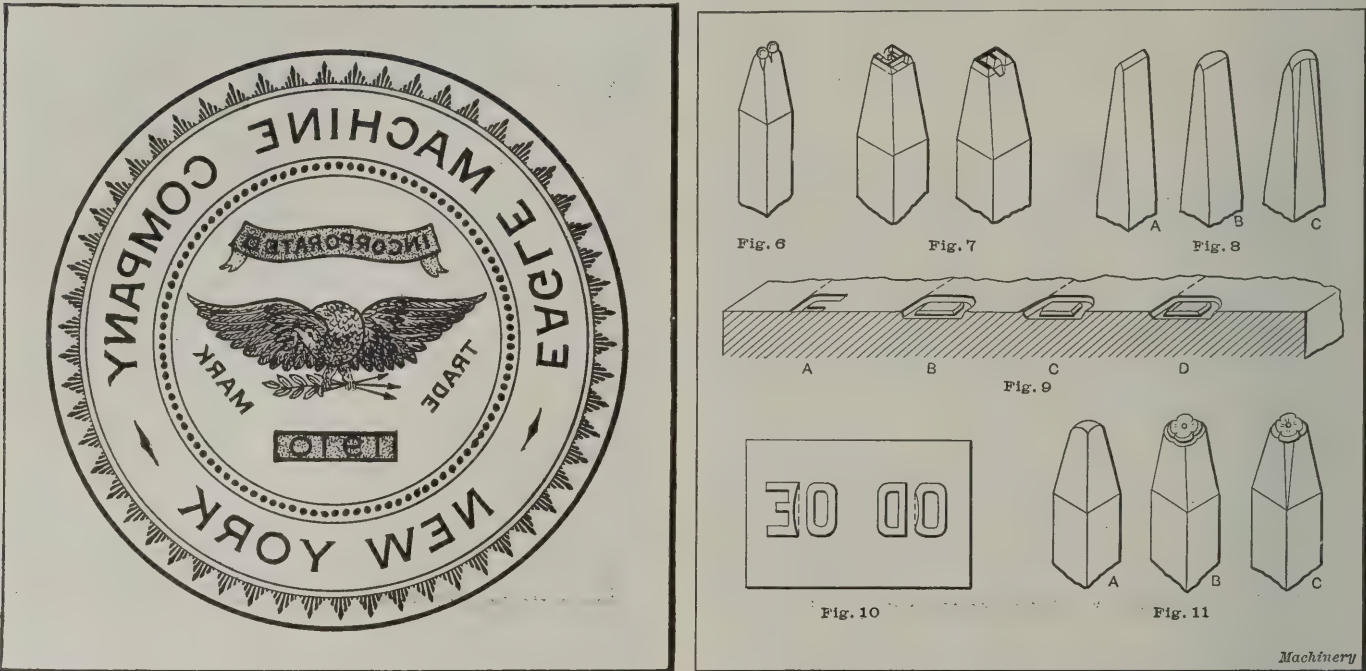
The Face of a Name-plate Die. Fig. 6. A Double-bead Punch. Fig. 7. Comparison between a Die Letter and an Ordinary Stamping Letter. Fig. 8. Three Types of Lining Tools. Fig. 9. Illustrating Points in Stamping. Fig. 10. How Close Stamping displaces the Steel. Fig. 11. Three Steps in Making a Punch
